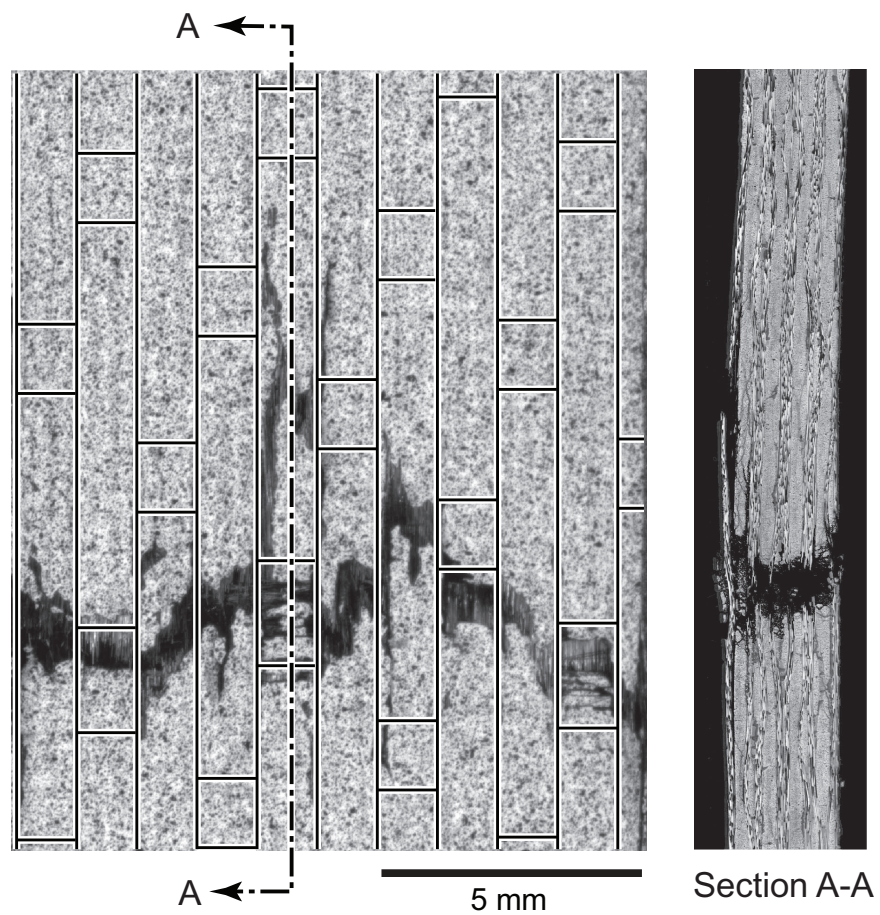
Plan view and through-thickness cross-section through fractured specimen.
